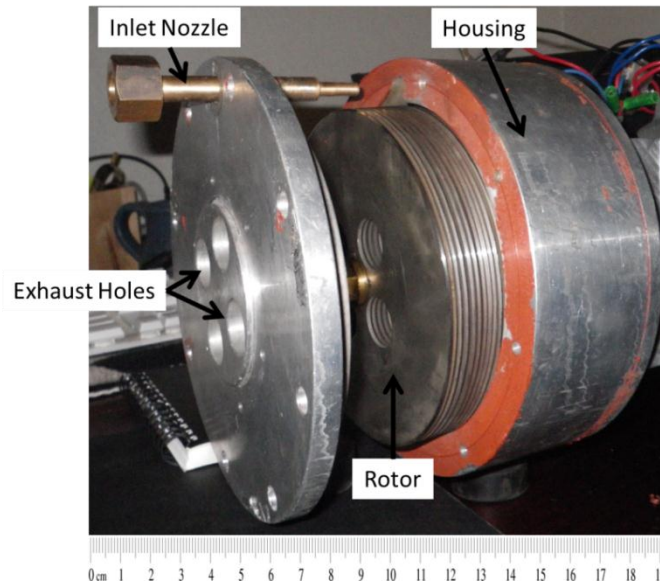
Entire Tesla turbine assembly showing the rotor blades, housing, inlet nozzle and exhaust. Ruler (cm) added for approximate size scale.
